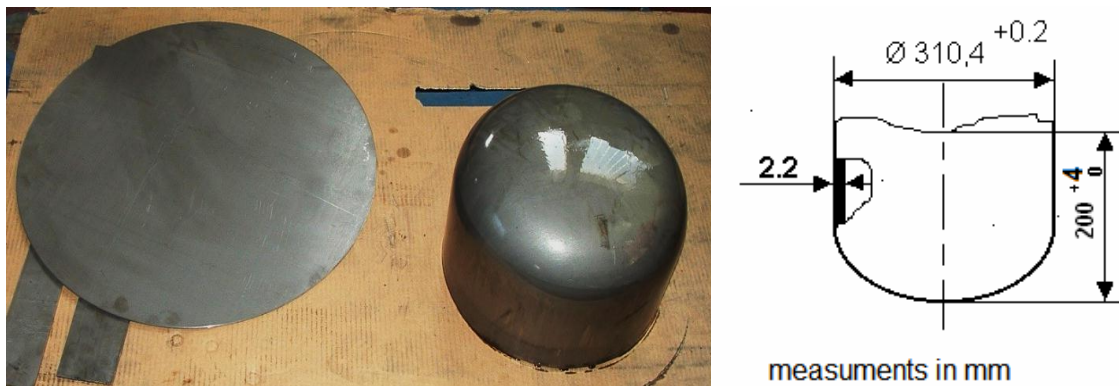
(a) Workpiece metal disc and formed b) Measurements of formed workpiece
